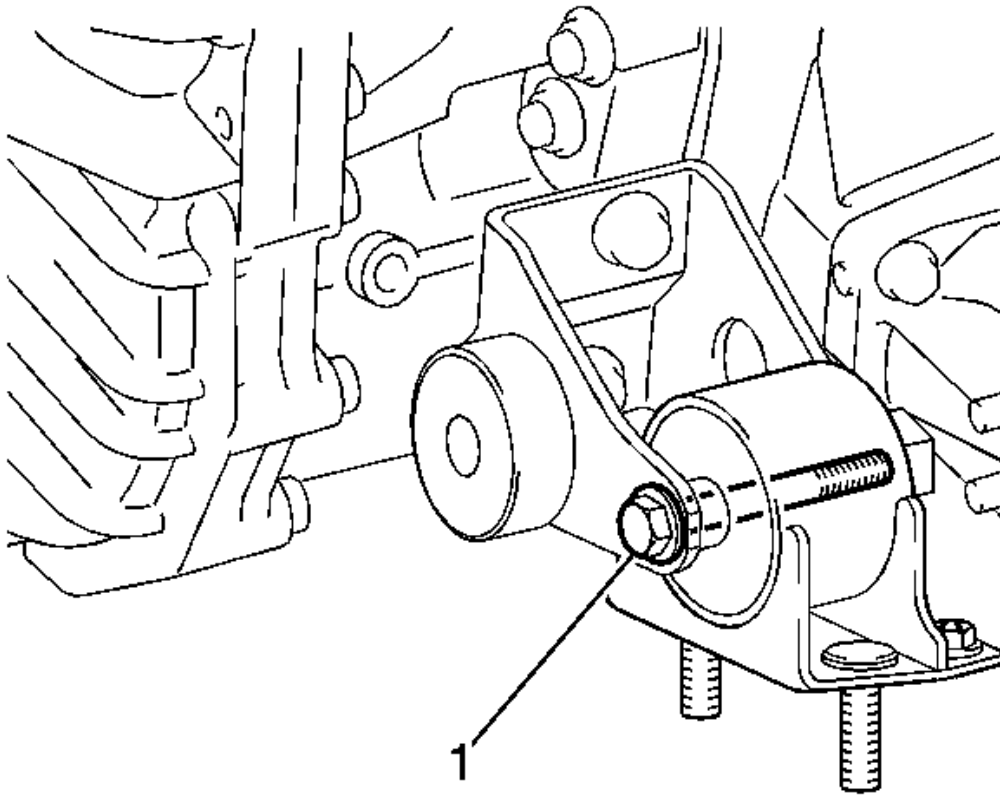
Identifying Rear Engine Mounting Insulator Through Bolt - 4WD
